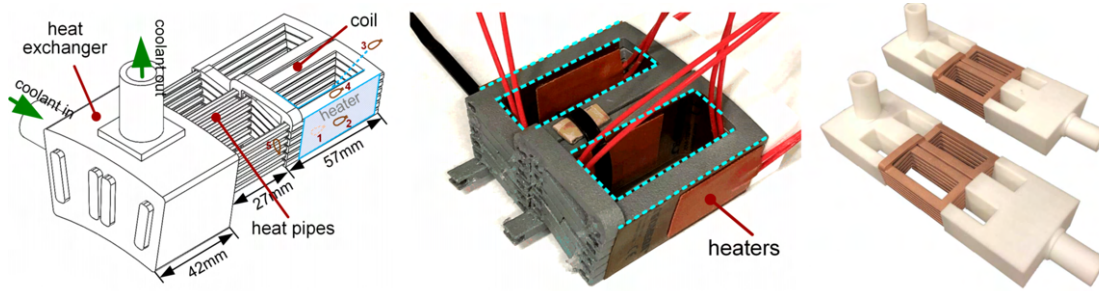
Coils 3D-printed with hollow conductors for heat pipes (left), or for fluid channels (right) to improve cooling properties [99, 95].
